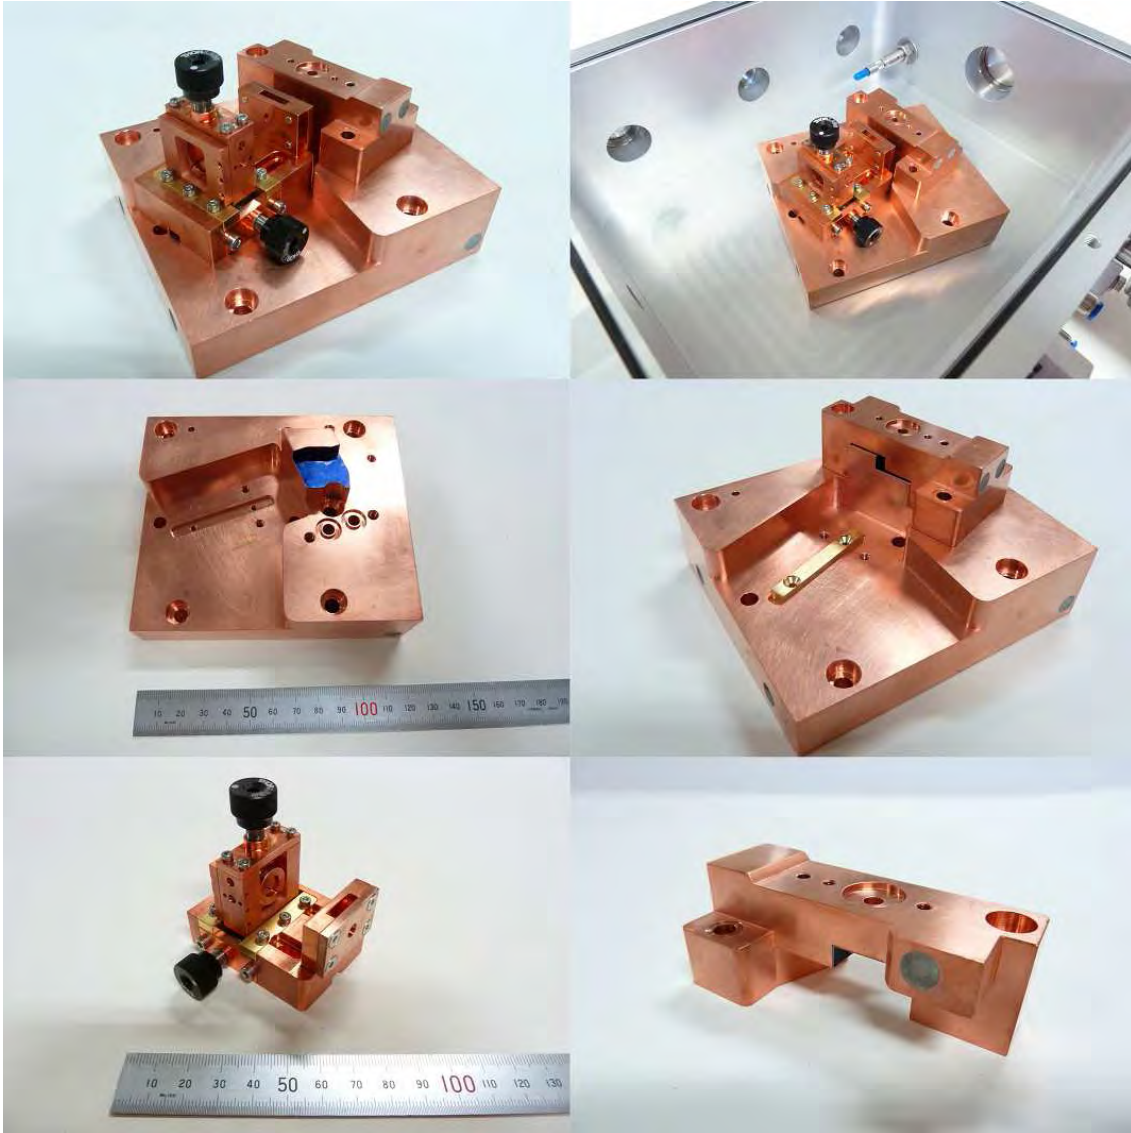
Photographs at different steps of the clamshell base, clamshell hat and collimator mount after fabrication and during assembly.
